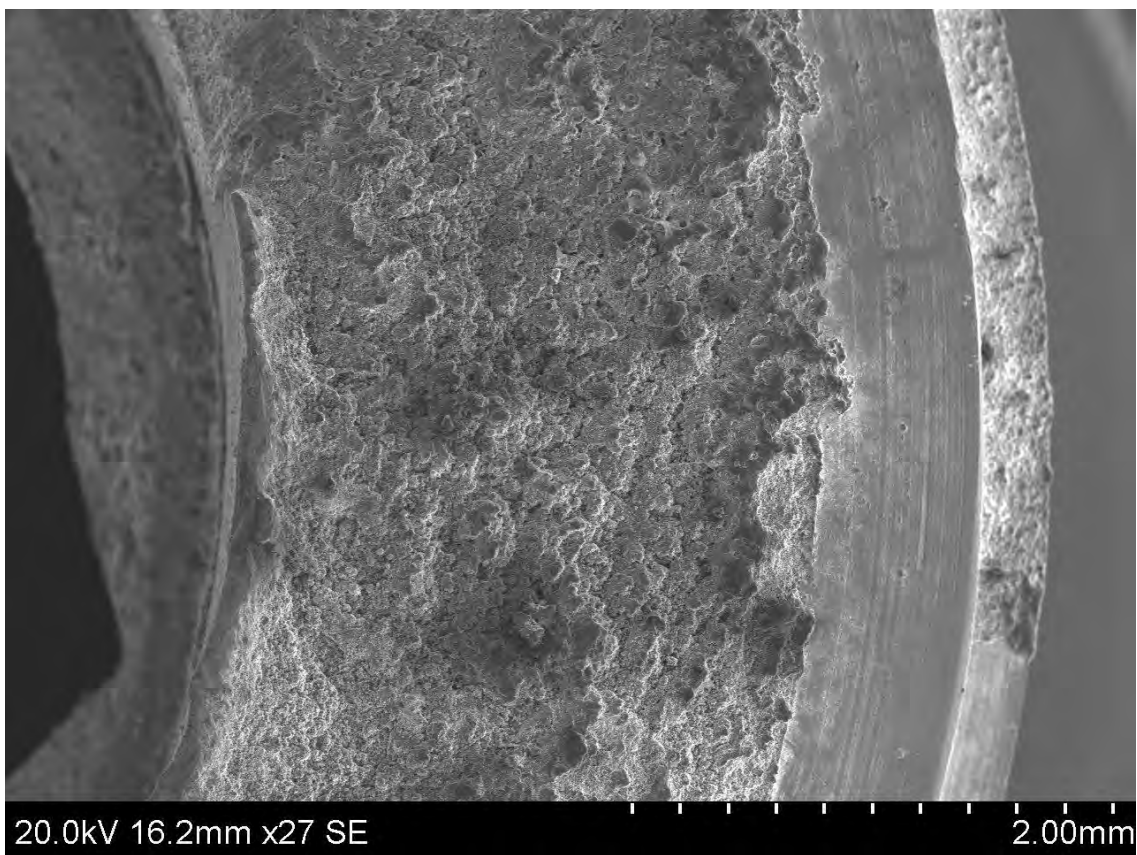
SEM micrograph of pressure regulator adapter fracture surface.
